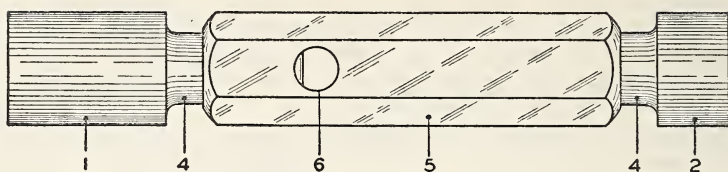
DETAILS OF CONSTRUCTION, AMERICAN GAGE DESIGN STANDARDS
